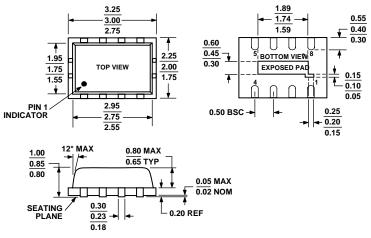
8-Lead Lead Frame Chip Scale Package [LFCSP_VD] 2 mm × 3 mm Body, Very Thin, Dual Lead (CP-8-1) Dimensions shown in millimeters
